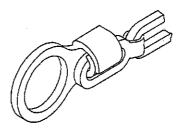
ACCELERATOR CABLE ADAPTATION
